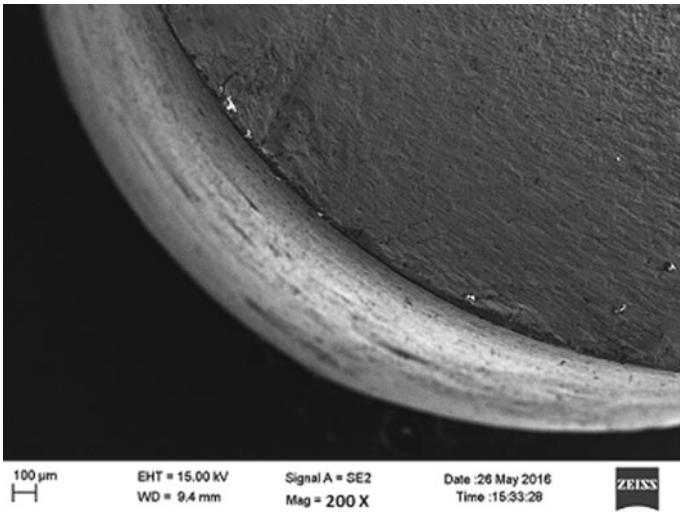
Fractograph of HTC16 specimen indicating no surface crack initiation
